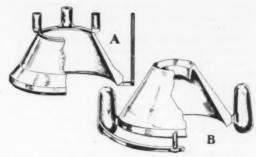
(A) Five-foot mantle casting for gyratory crusher was run in the bottom flange and fed by gravity heads-yield, 77 per cent. (B) Mantle casting fed by atmospheric heads gives 75 per cent yield.
